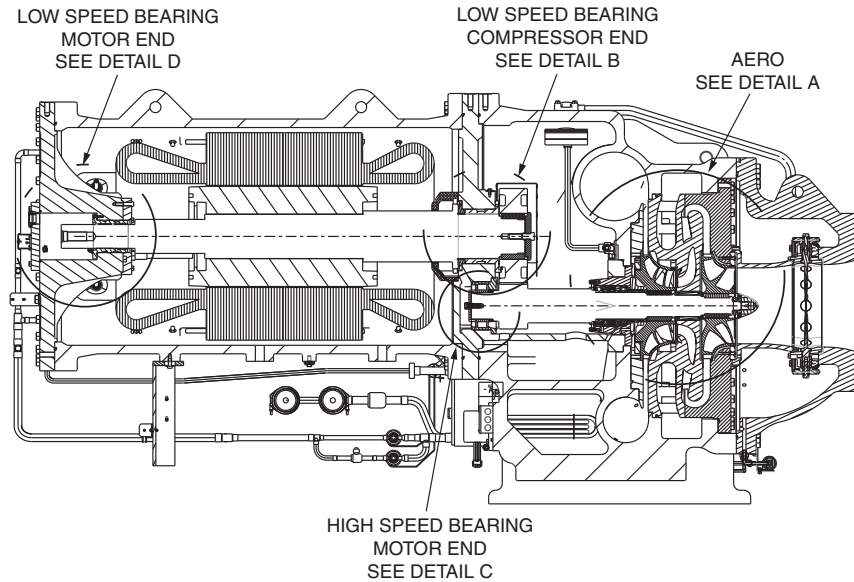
Compressor Fits and Clearances — Two-Stage Compressor, Frame Sizes 6 and 7
